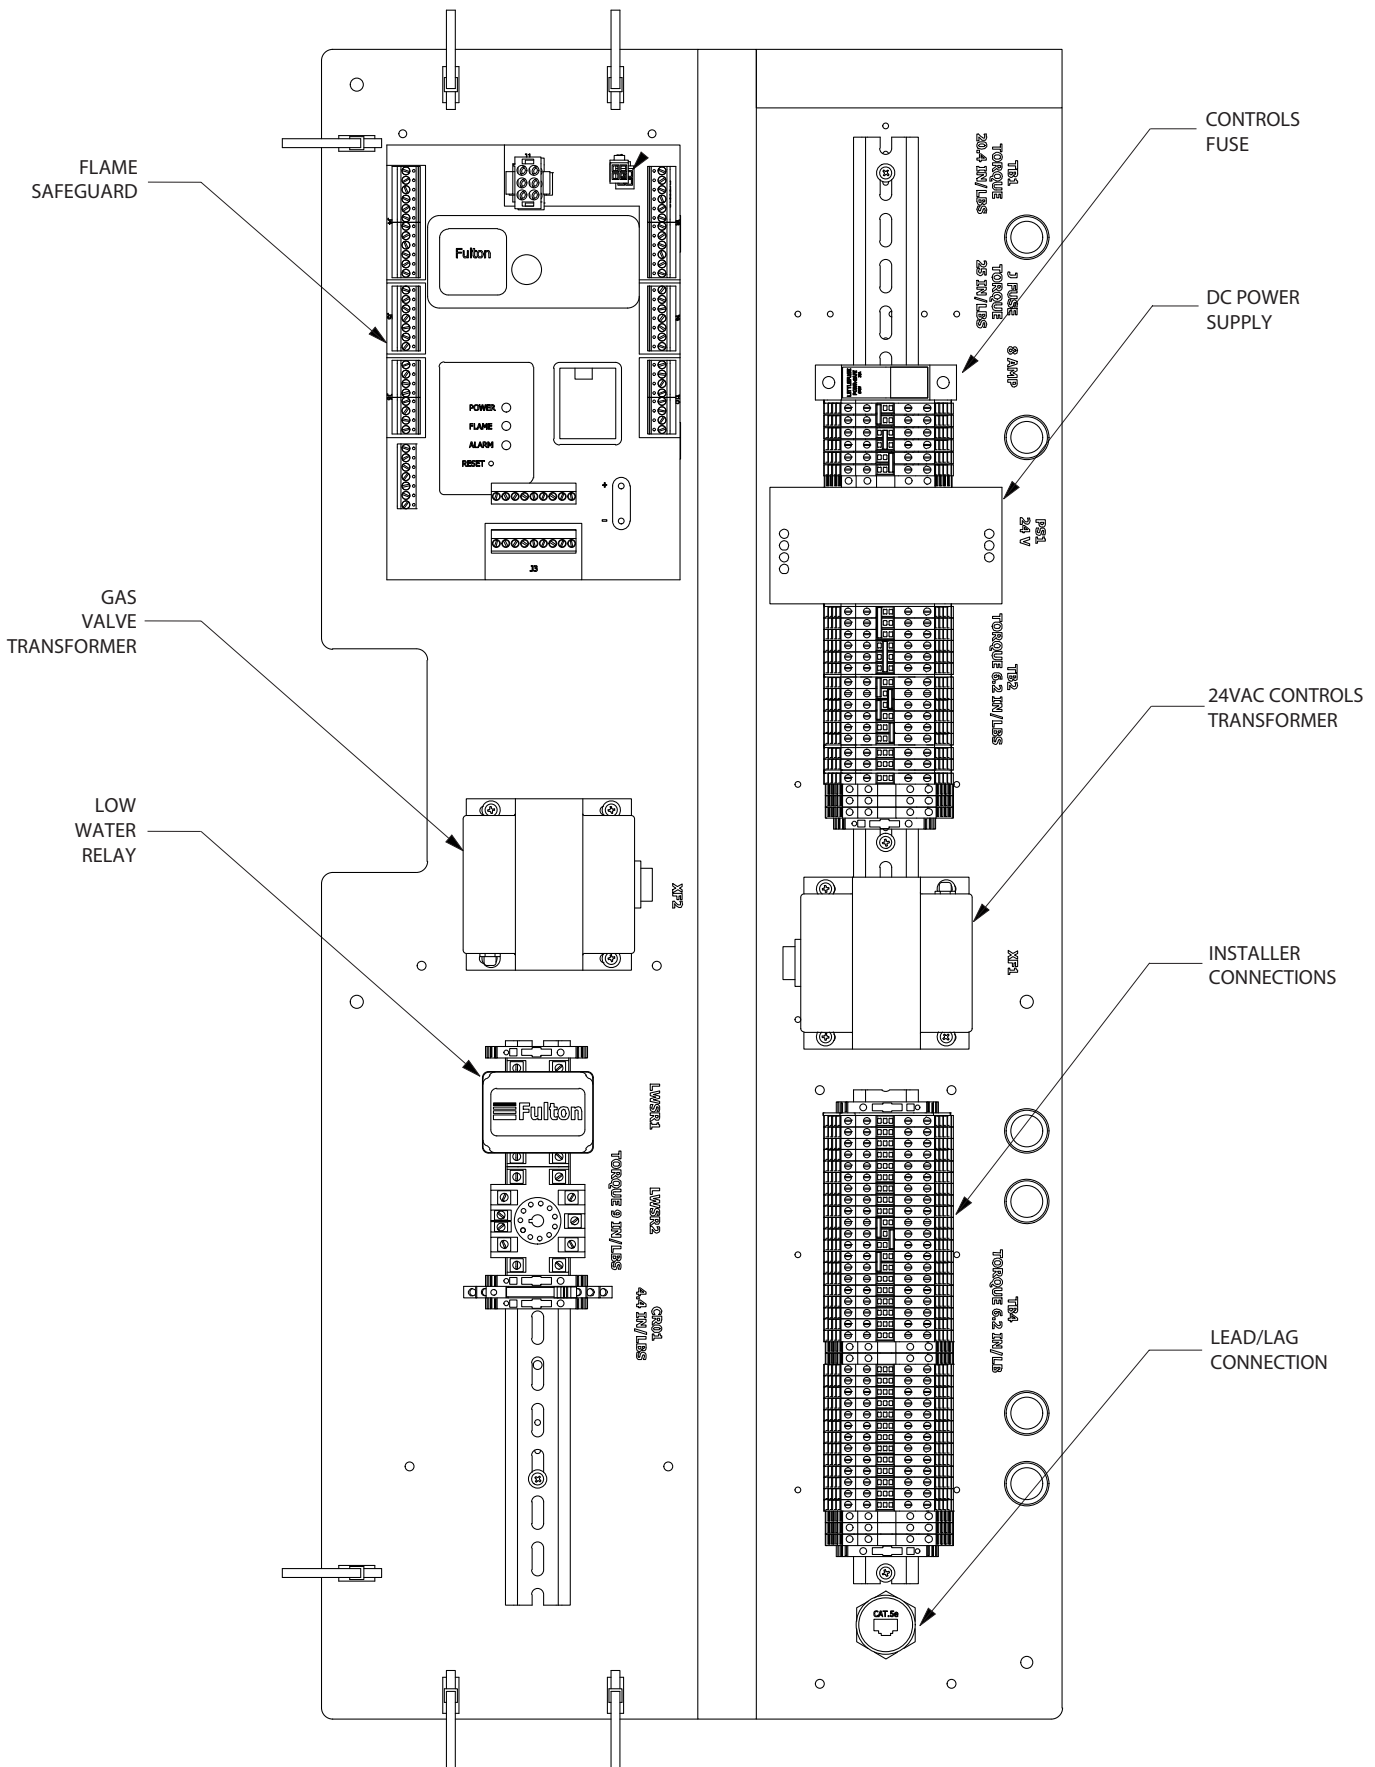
ELECTRICAL CONTROLS LAYOUT (EXE-1000-3000 REFERENCE ONLY)
